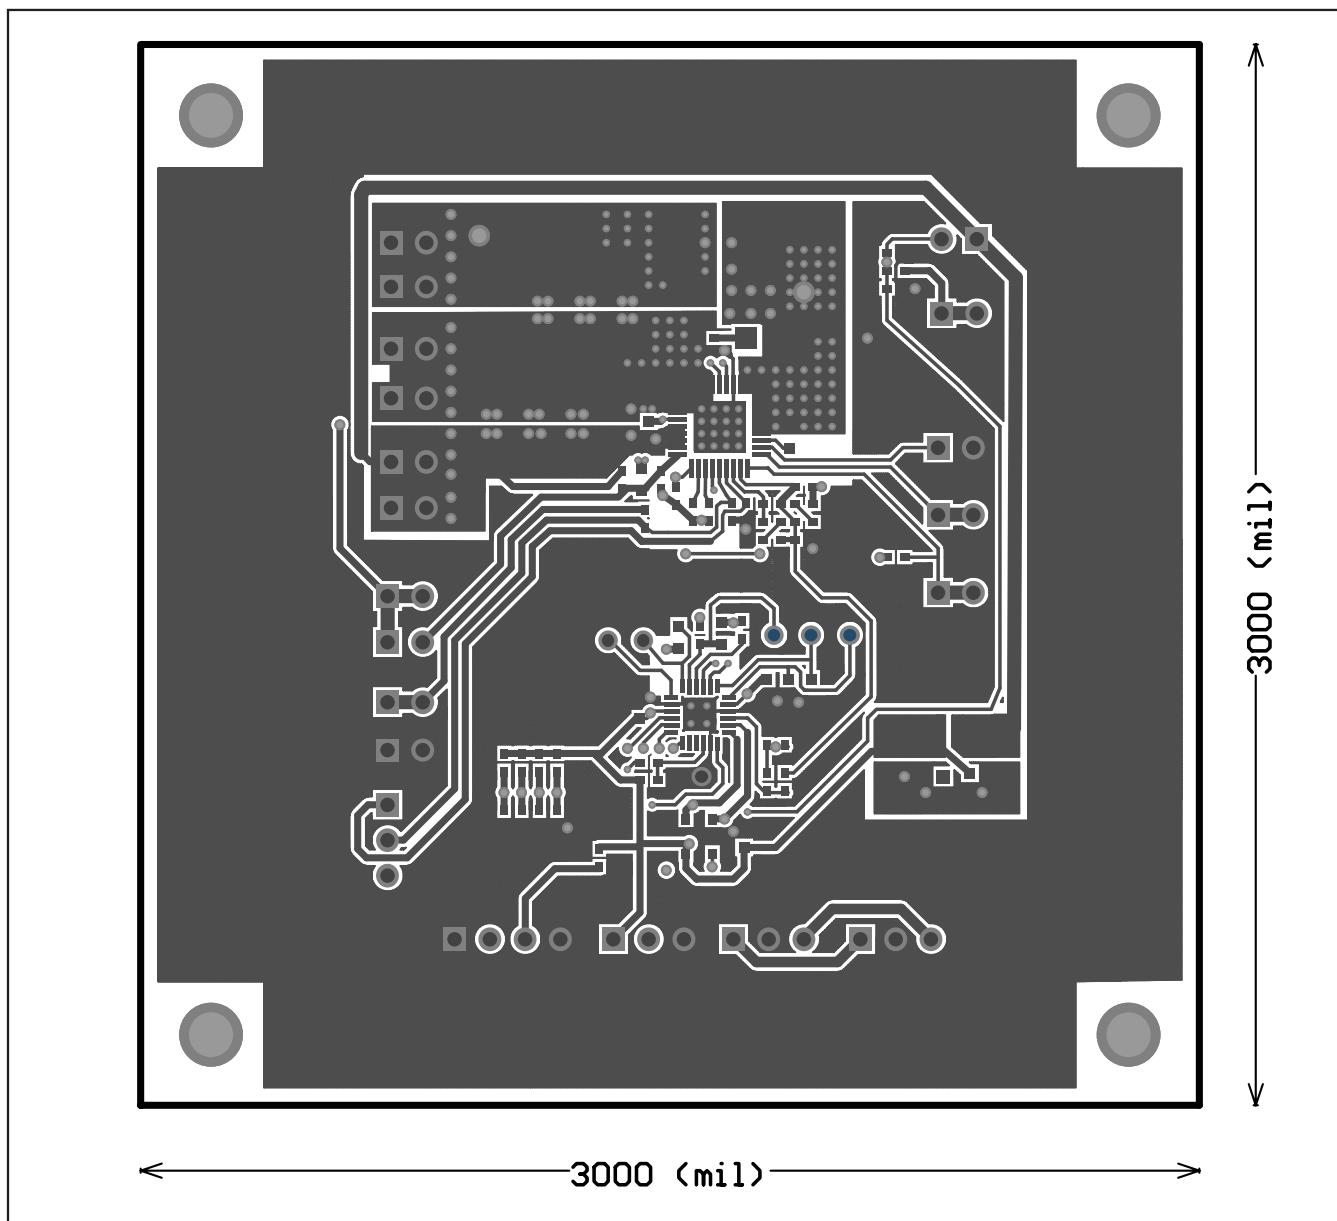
MAX8654 EV Kit PCB Layout—Component Side
